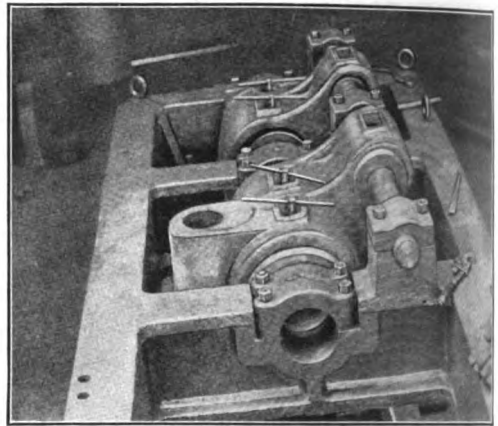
VIEW OF HEADSTOCK FROM ABOVE WITH JIG IN POSITION
